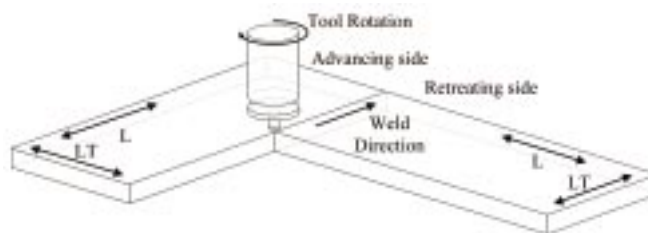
Schematic of corner weld geometry and FSW orientation
